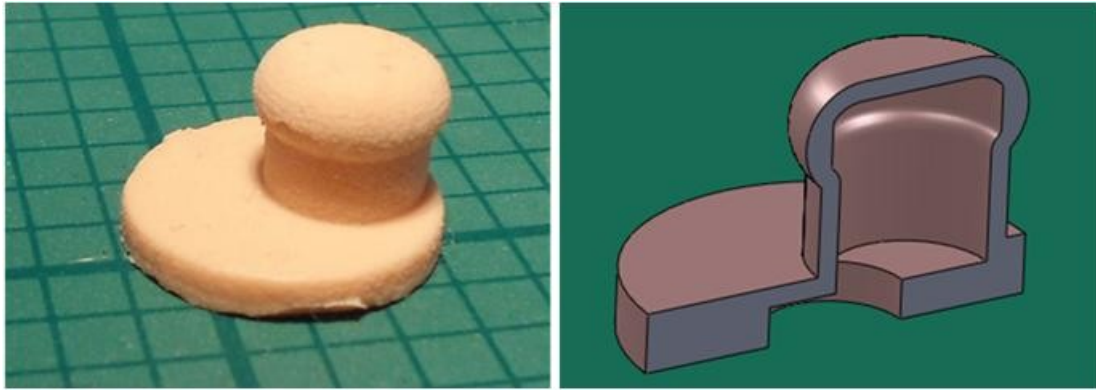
Modified ampulla part (l) moulded from silicone rubber and (r) cross sectional view of part CAD model. The hole piercing the top surface of the ampulla is not visible in this image.
